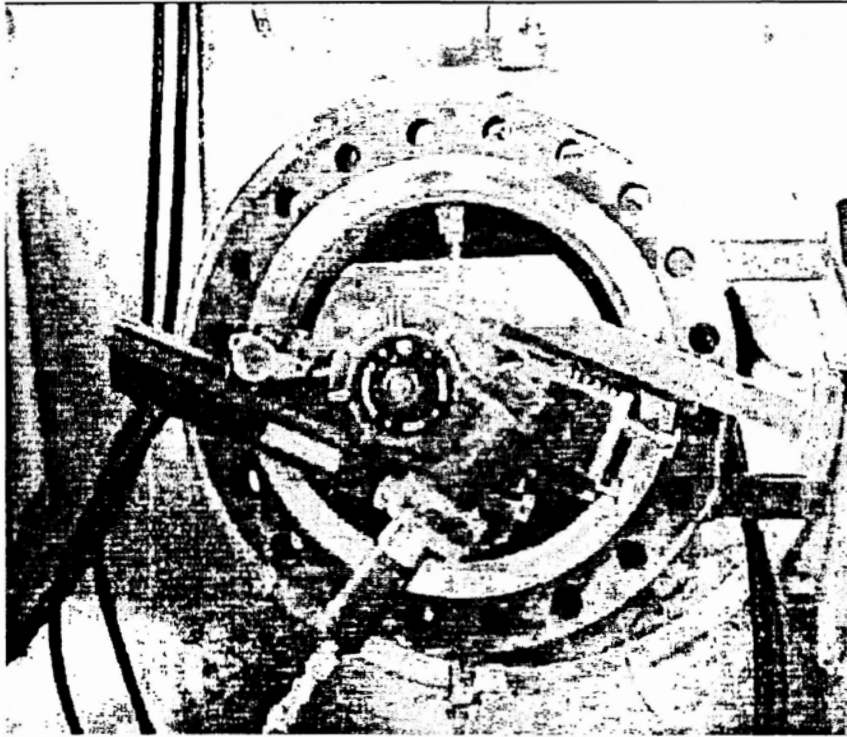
Portable flange-facing machine mounted to the ID of the lower manway flange
